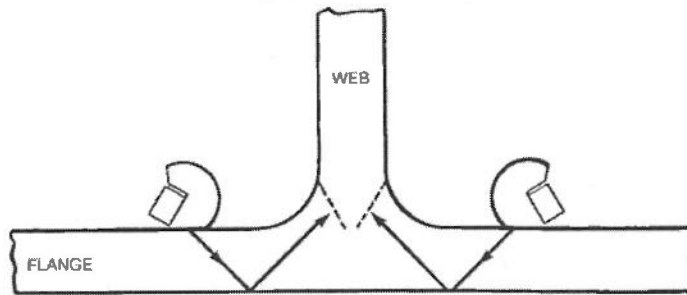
(b) Alternative Technique 7, for Searching T-Welds for Discontinuities
